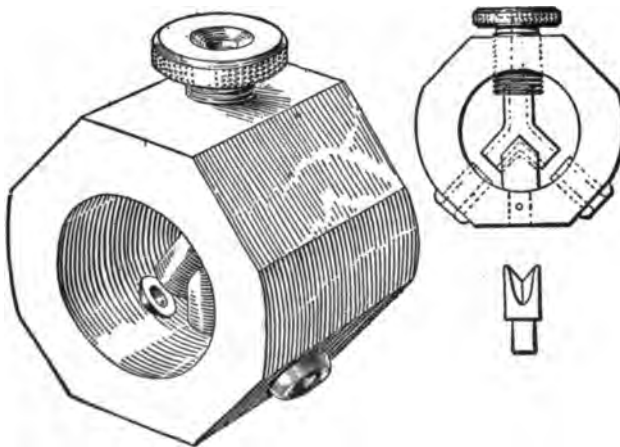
DRILL JIG FOR Y CONNECTIONS
